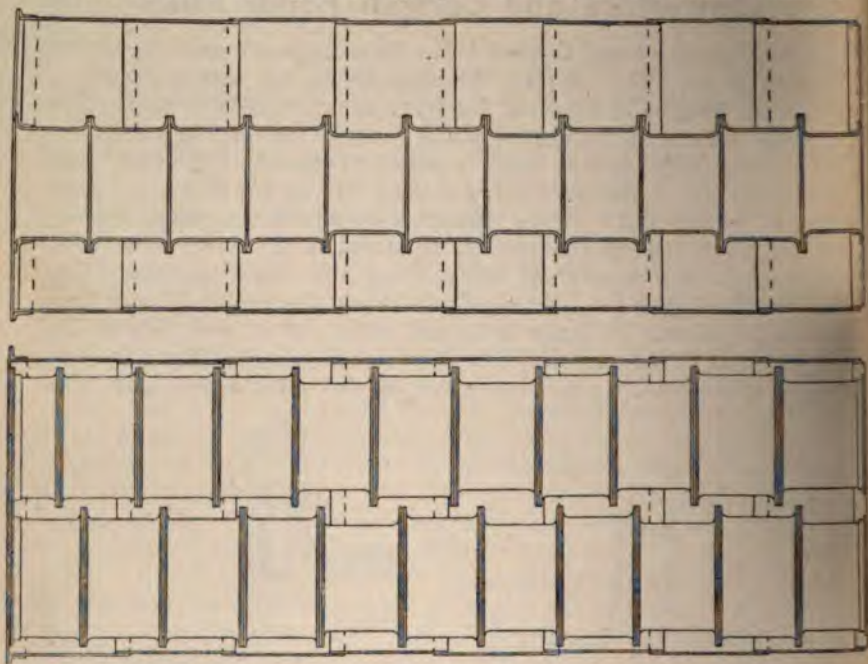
Sectional Elevation and Plan of a Lancashire Boiler, having its Flues fitted with Adamson's Absorber Flange.
